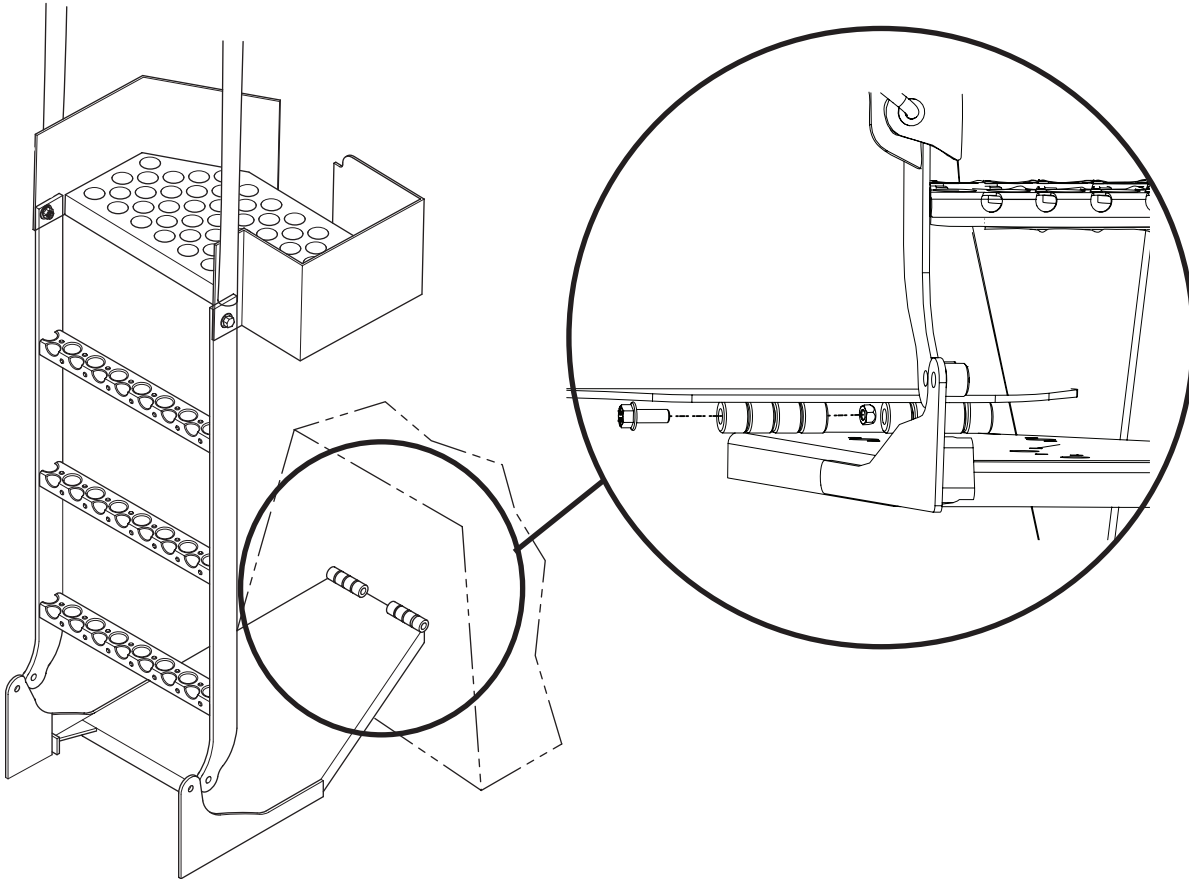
Remove and discard the (2) bolts and (2) nuts from the rear pedestal side of the platform. Only one side shown here.
